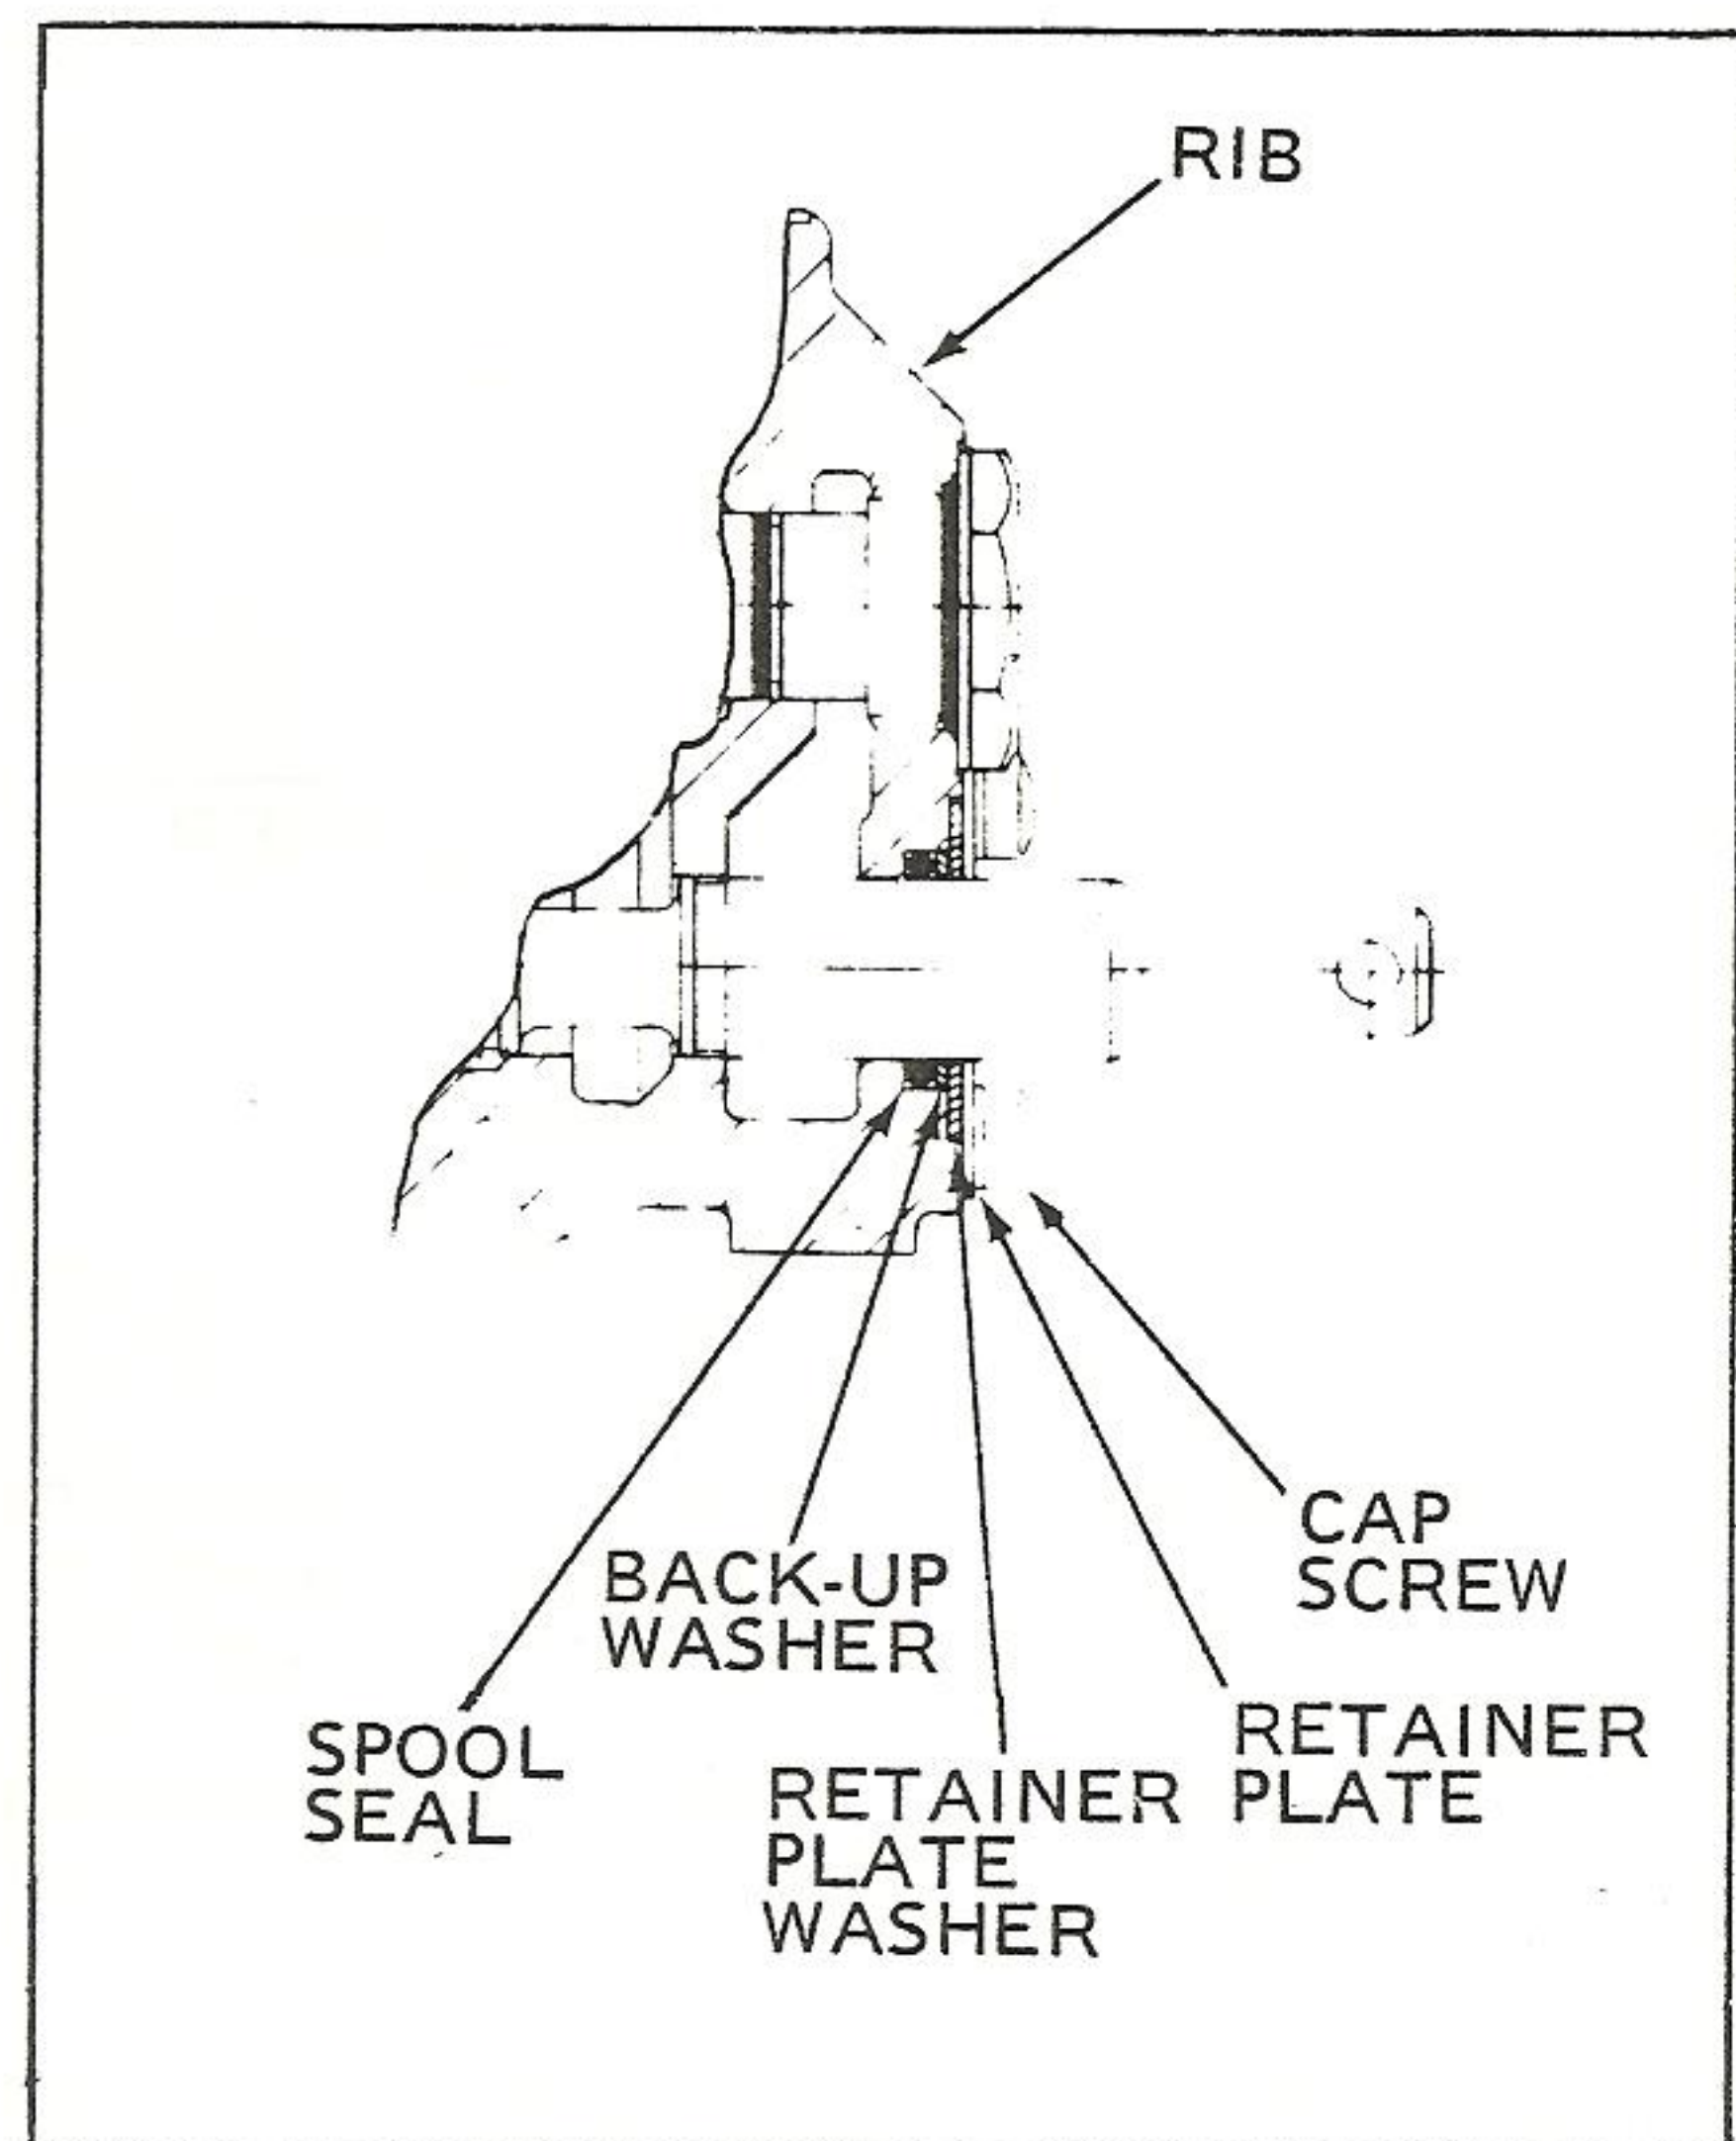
21. SPOOL SEAL ASSEMBLY
